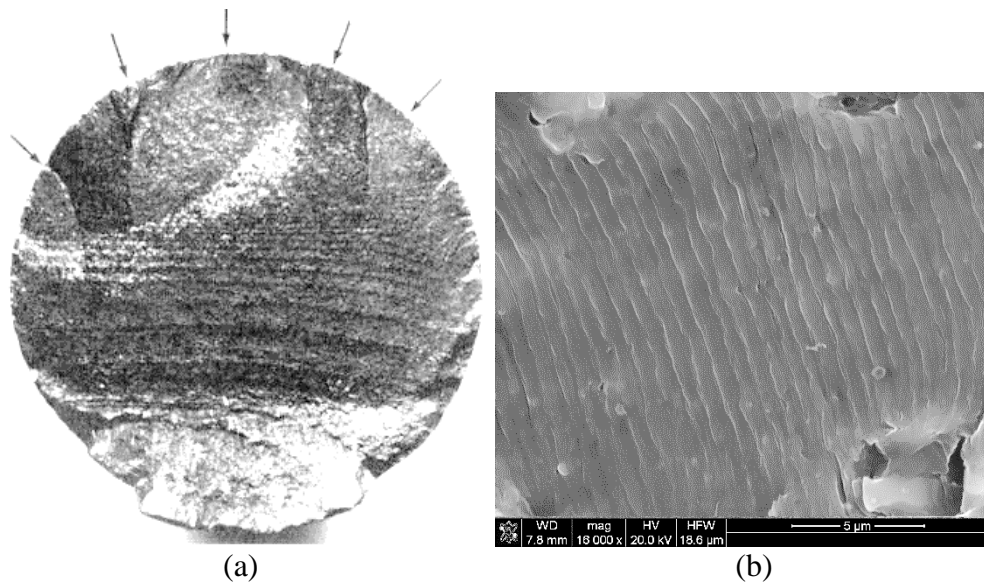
(a) Fatigue fracture surface [30], (b) Striations.
